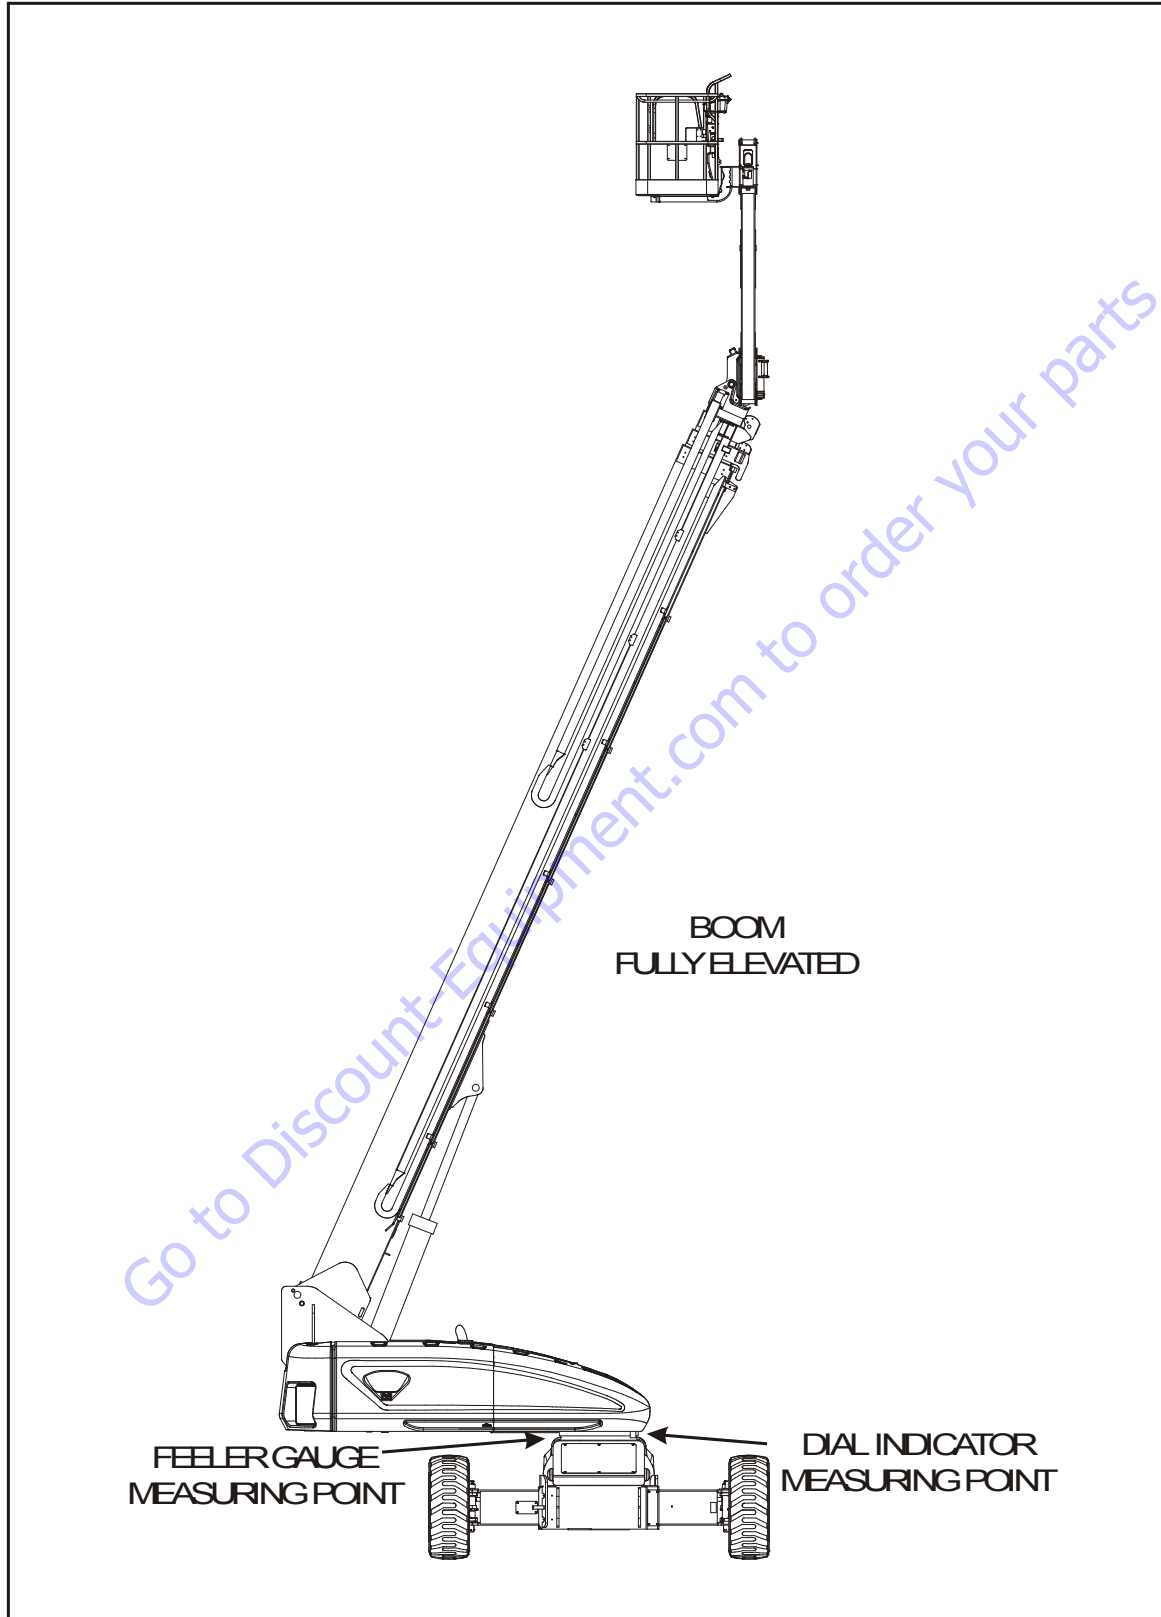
Swing Bearing Tolerance Boom Placement - Sheet 1 of 2
